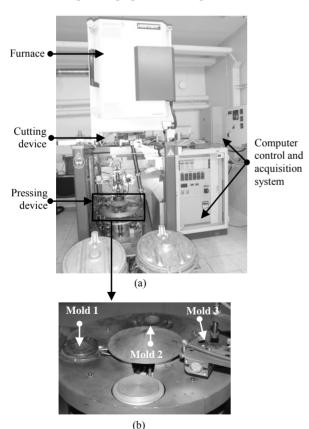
The Glass Tool Interaction platform: (a) the four main parts, (b) the three molds placed on the mold conveyor belt.
